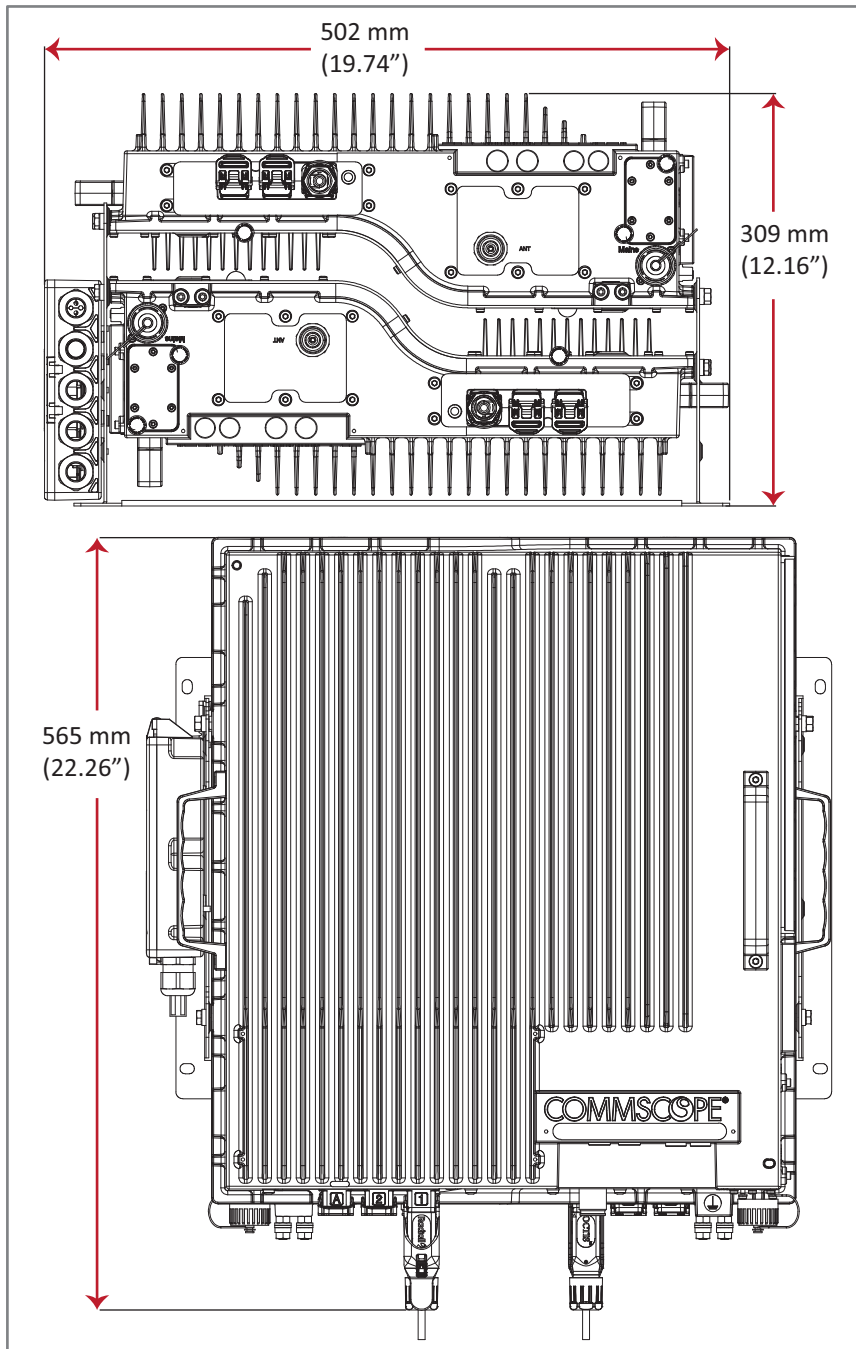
Mounting Dimensions for the Dual Mounting Bracket with Splice Box
